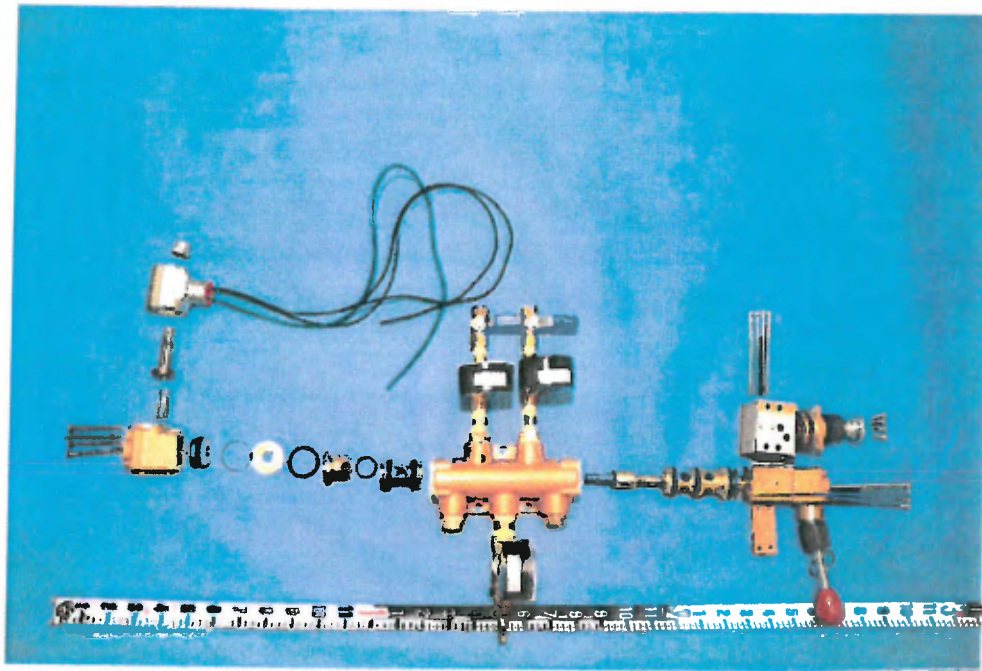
Disassembled Exemplar Versa Bottom Dump Valve
